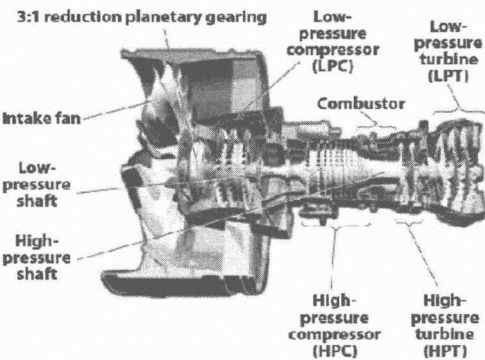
Pratt & Whitney’s Geared Turbofan engine schematic
